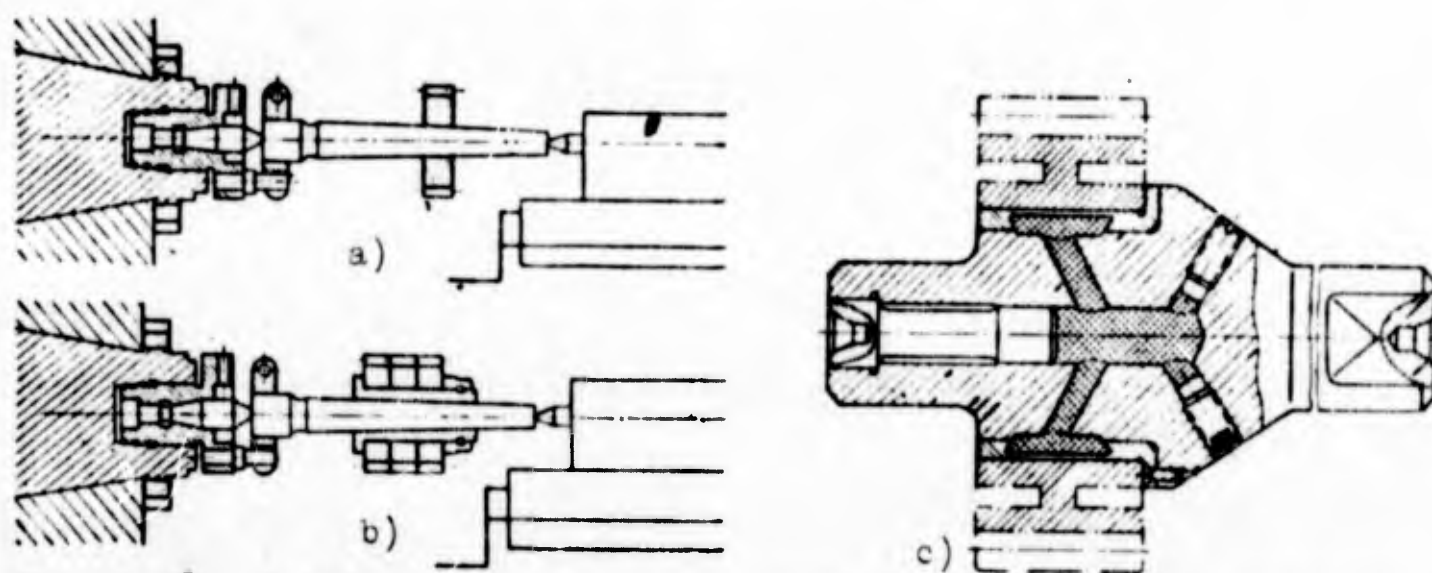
Setting of gears on gear-grinding machine. a) directly on tapered mandrel; b) on tapered mandrel through bushing with clamp nut; c) on expanding hydraulic mandrel.
